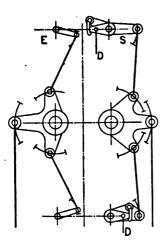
Corliss Gear in a Vertical Engine, with Two Eccentrics, and Valves in Cylinder-heads.
